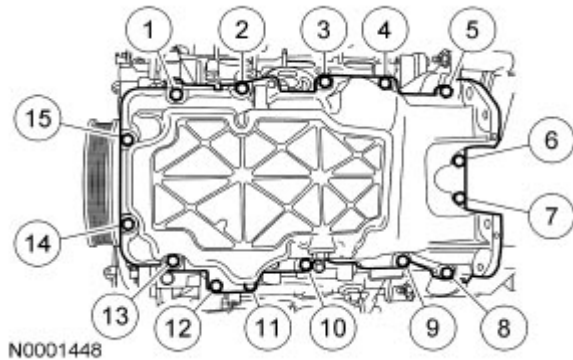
Tightening Oil Pan-To-Engine Bolts
